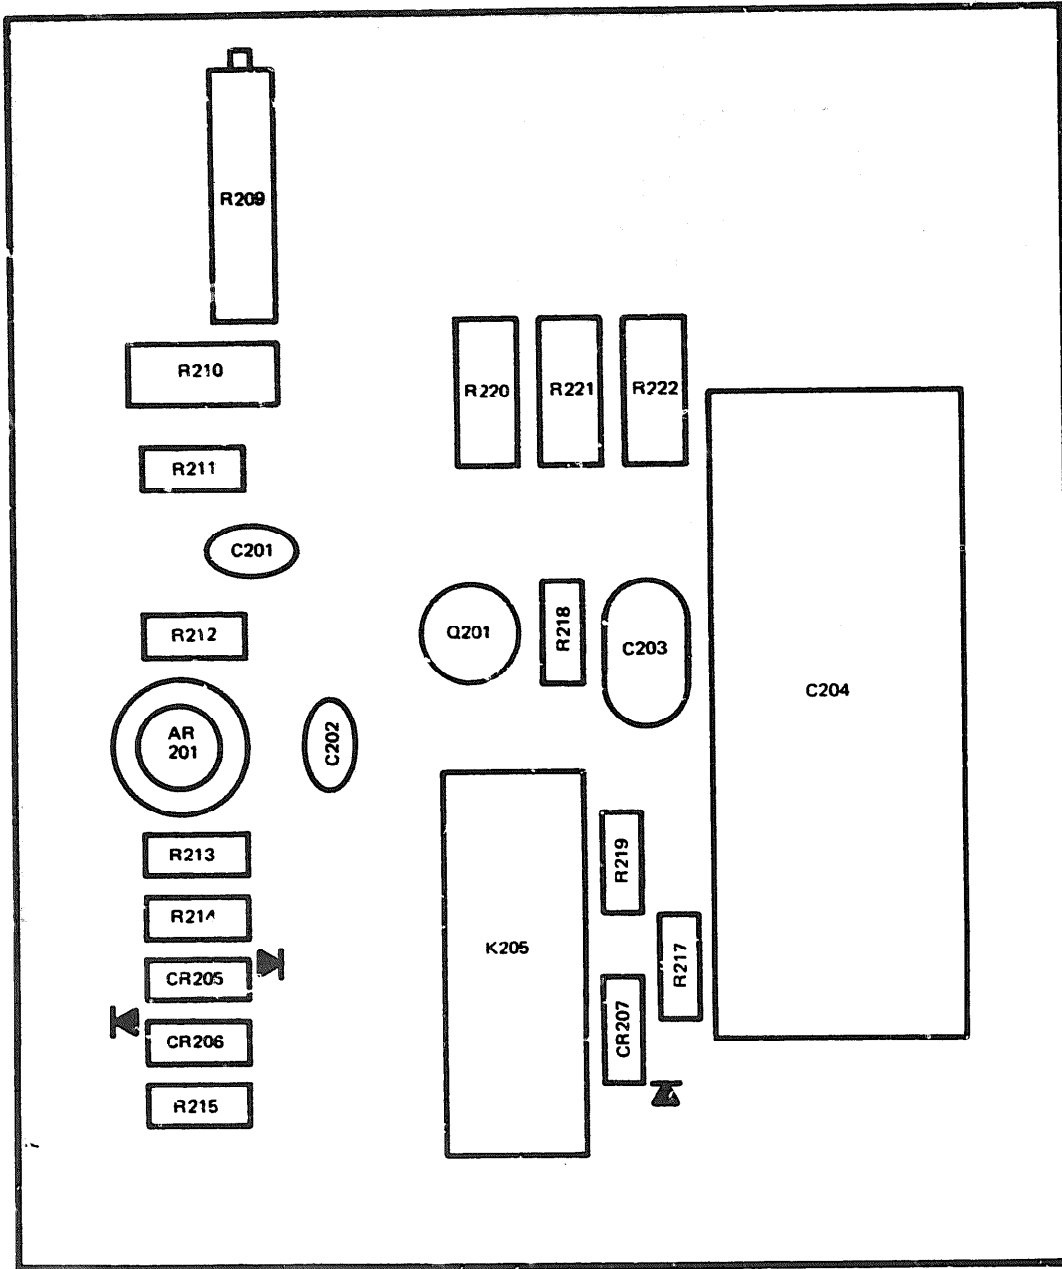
Amplifier no. 2, printed circuit board HTA-3A9A1A6, parts location
